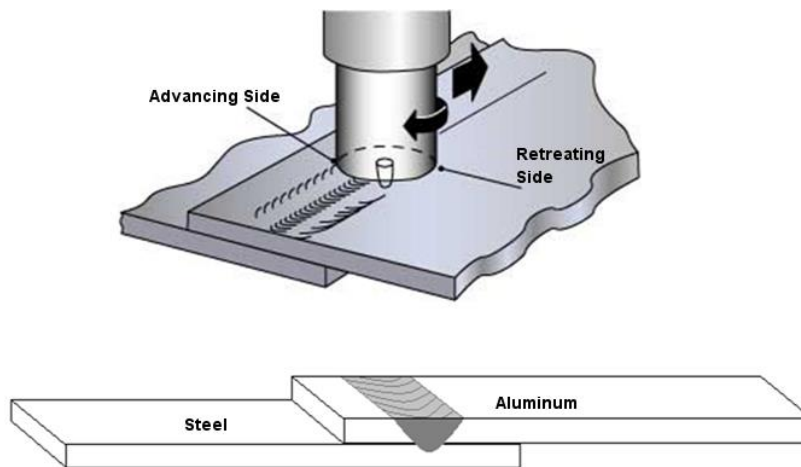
Schematic of friction stir weld in a lap weld configuration [18].
